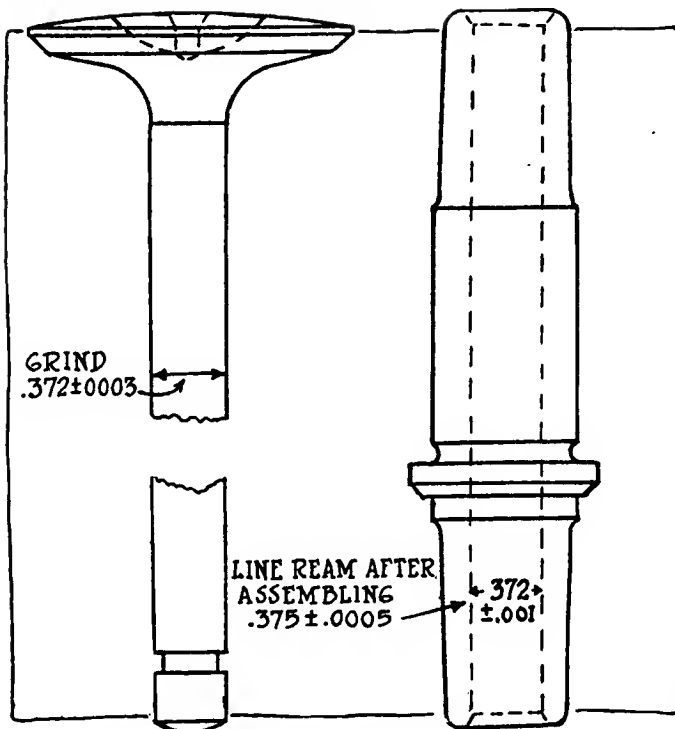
Details of Continental 7-H model motor valve and valve stem guide, illustrating clearance
